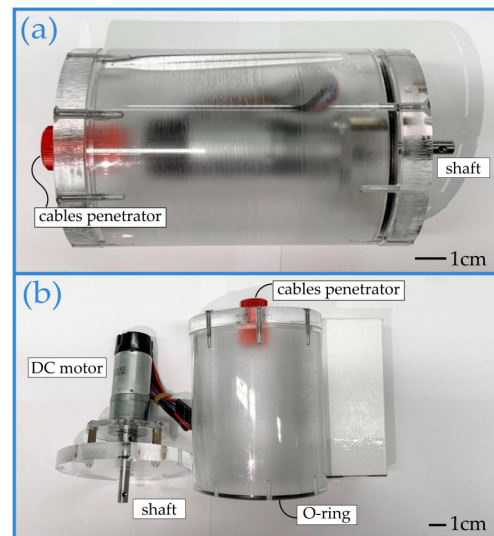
The acrylic waterproof canister containing the DC motor, closed (a) and open (b). The canister is composed of a cylindrical body and two caps, passing the motor's shaft on one side and the cables, through a cable penetrator, on the other. The motor is supported by an acrylic base, connected to one cap through 4 spacers. O-rings are used to provide the required sealing.
